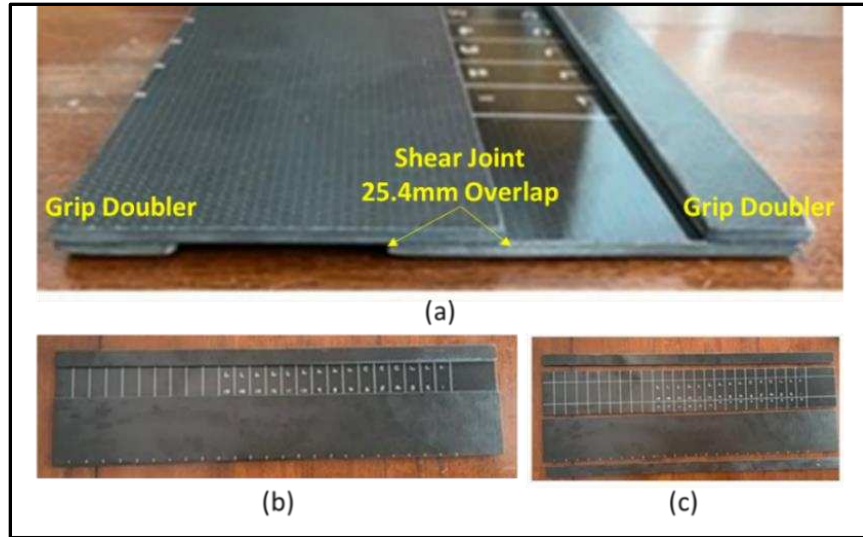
Adherend layout before adhesive cure: (a) side view, (b) plan view, (c) part view.
